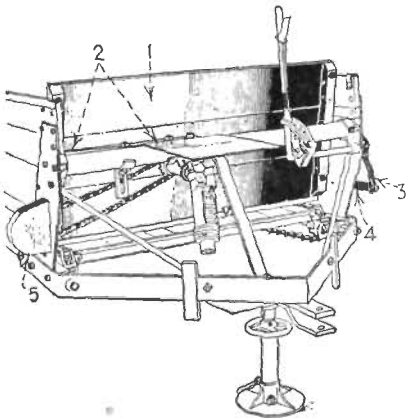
Front end of tractor manure spreader showing tractor hitch, slip-clutch drive, and main drive chain.
